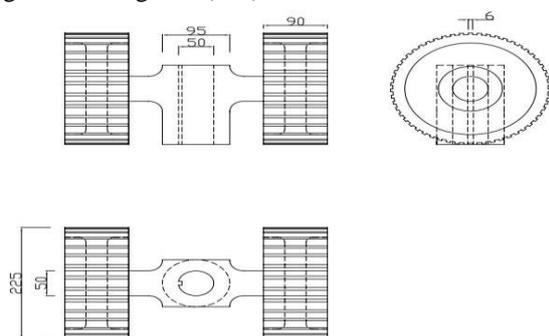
Elevation, plan, and side view of compressing unit (Rollers).
